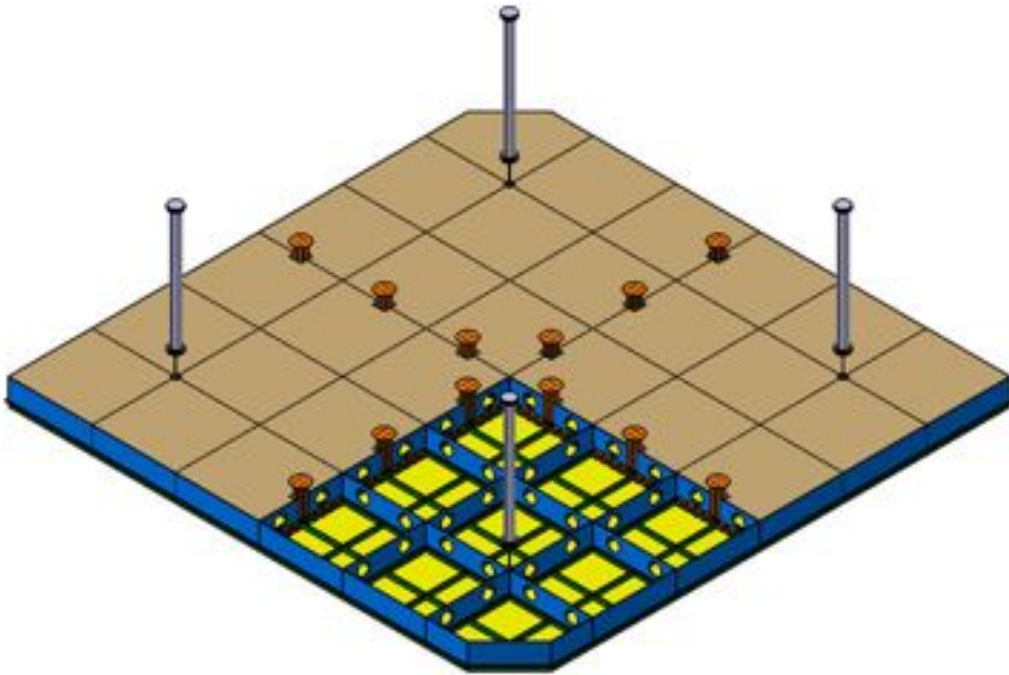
Assembled structure (with closing plate partially removed for viewing purpose).
